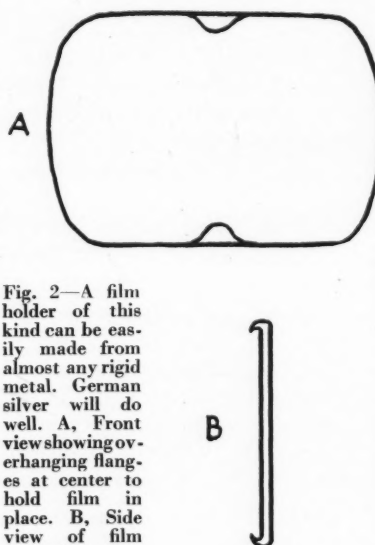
A film holder of this kind can be easily made from almost any rigid metal. German silver will do well. A, Front view showing overhanging flanges at center to hold film in place. B, Side view of film holder.
